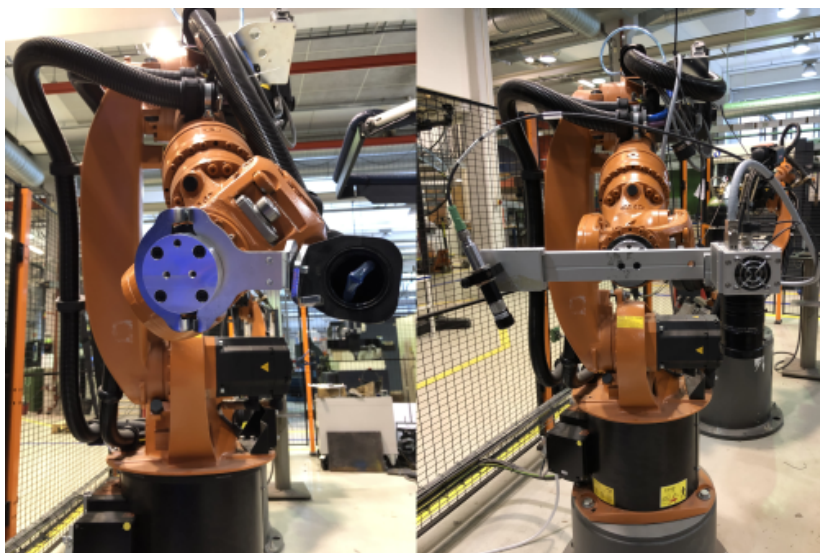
Laser vision sensor mounted on the KUKA KR16-2 end effector
